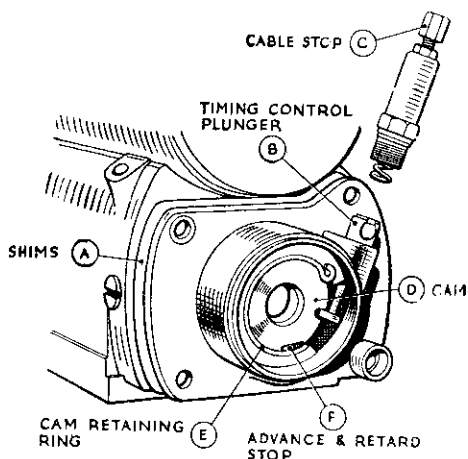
Contact breaker housing, showing timing control mechanism
